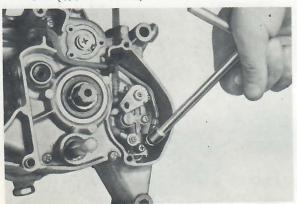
Unscrewing oil line union bolt with 8 mm wrench
